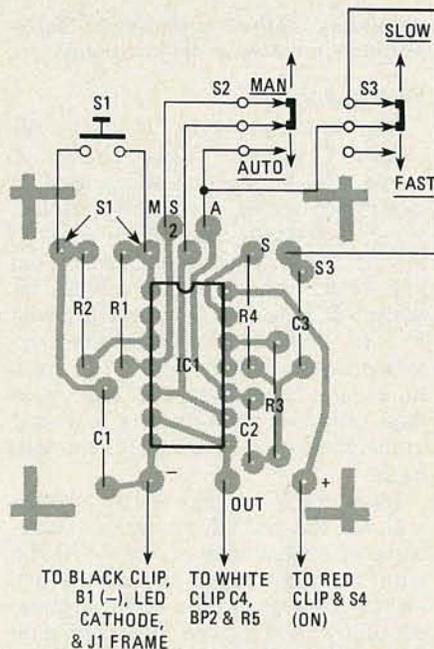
PARTS PLACEMENT DIAGRAM also indicates connections to components mounted on- and off-board.
